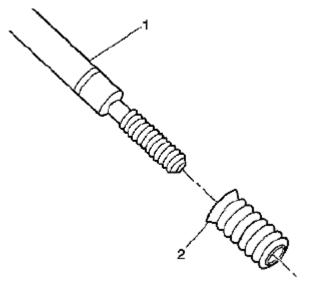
Lubricating Threads Of Driver Installation Tool With J 42385-110 Courtesy of SUZUKI OF AMERICA CORP.
